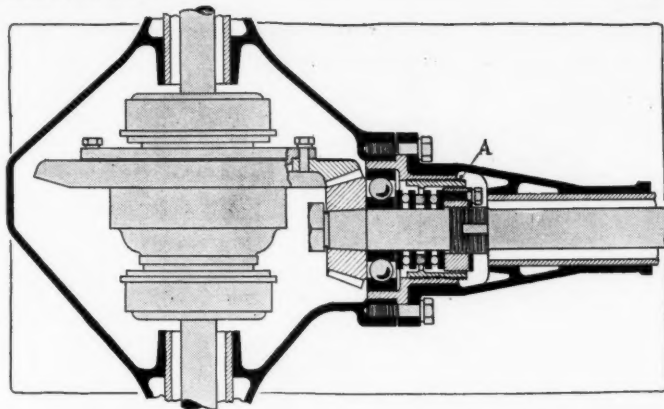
Chalmers model K rear axle. Pinion adjustment at A
